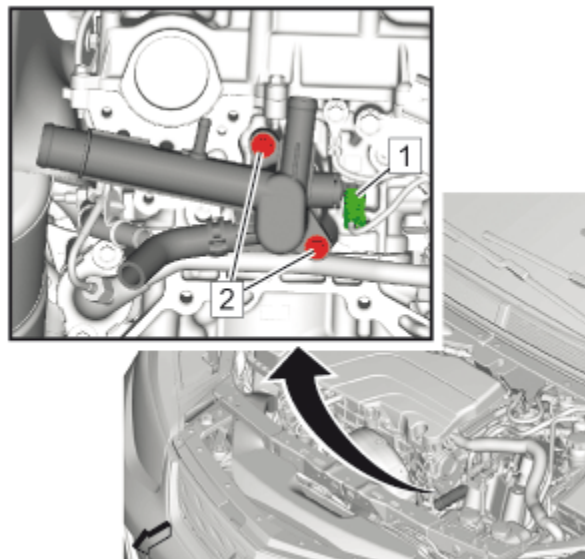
Engine Coolant Temperature Sensor Electrical Connector And Water Outlet Bolts
